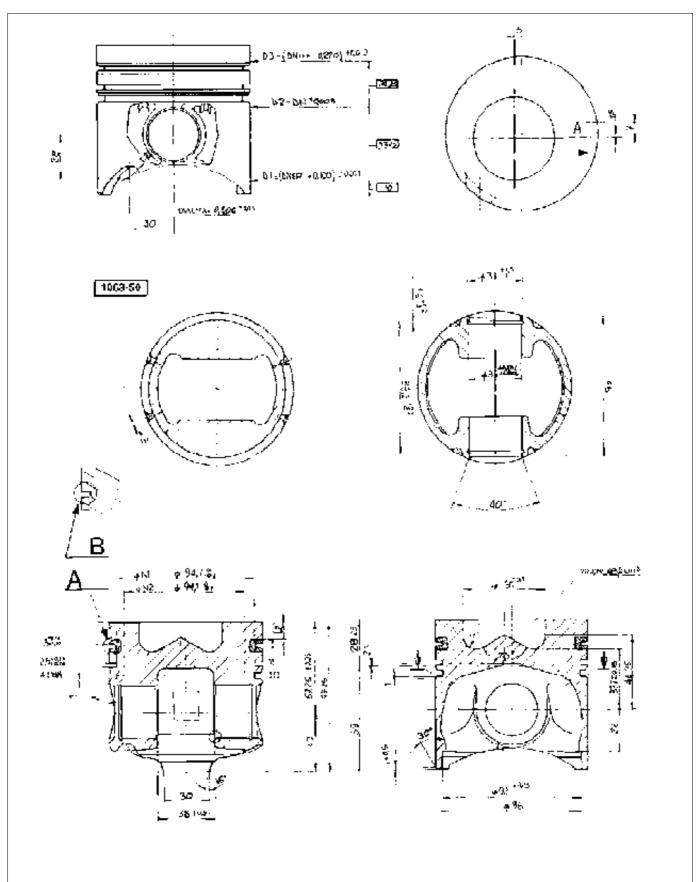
Pistons A - for turbocharged engines B - for aspirated engines.
